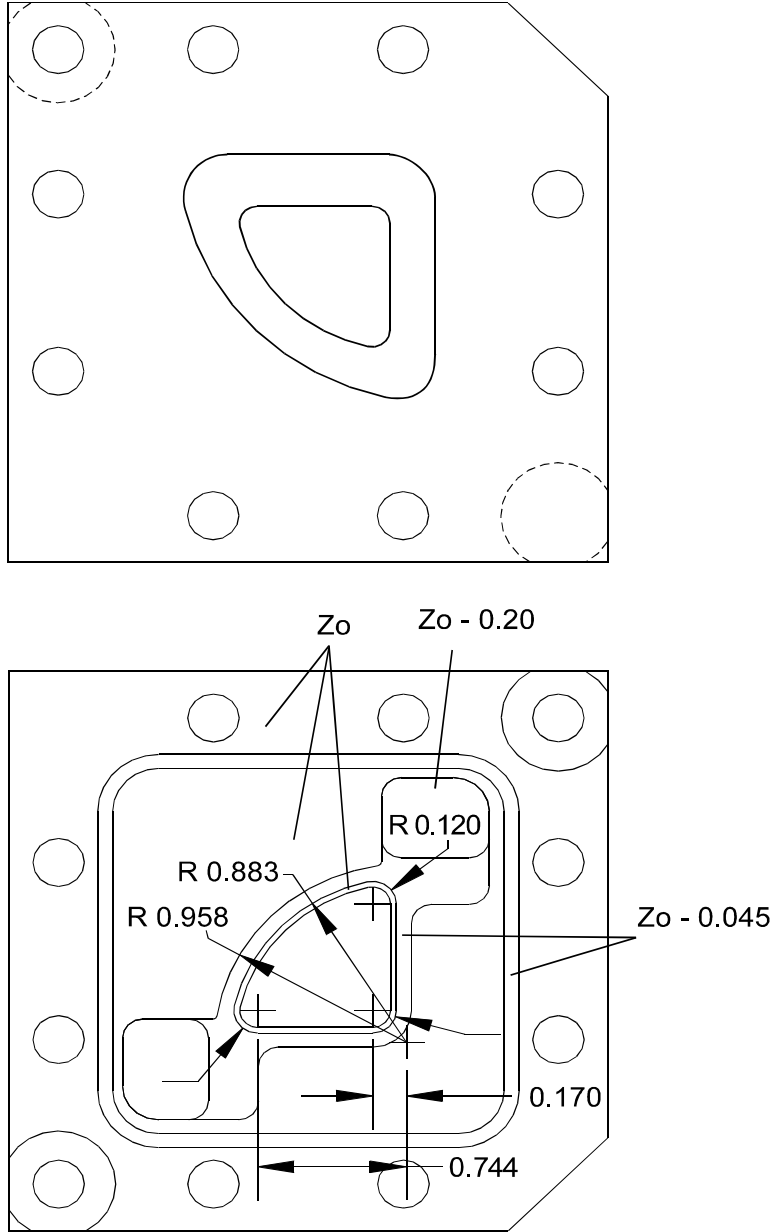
Quarter wafer o-ring sealing plating fixture, bolt ring. Inner groove accepts 2-020 size o-ring, while outer accepts size -034.
